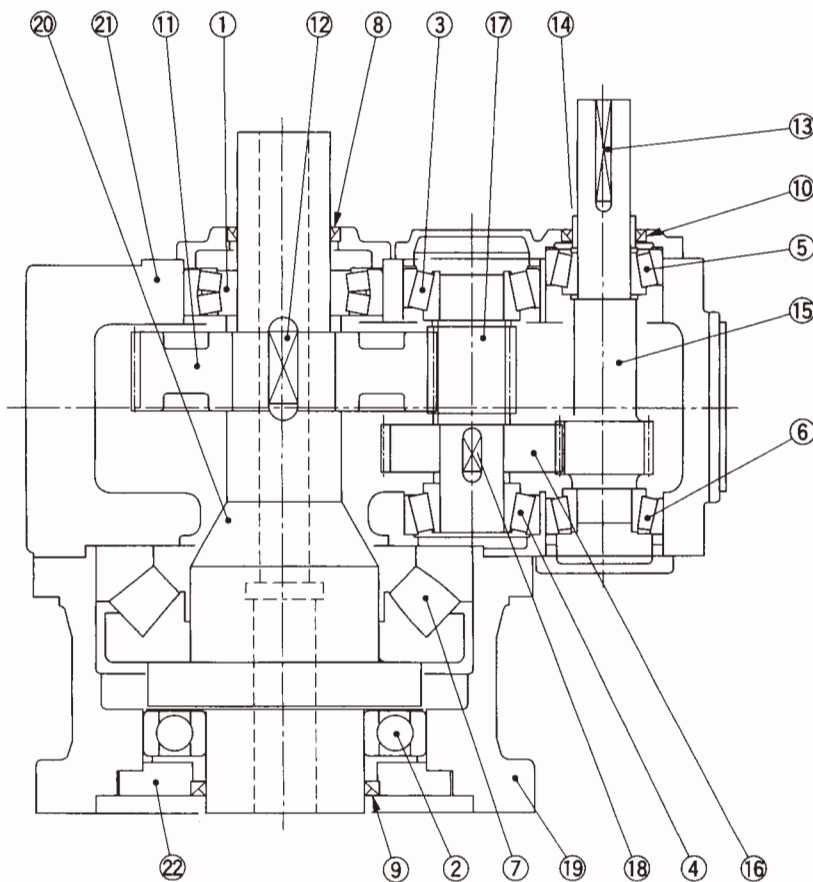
SEB005 — 050 (Heavy and medium thrust types)
